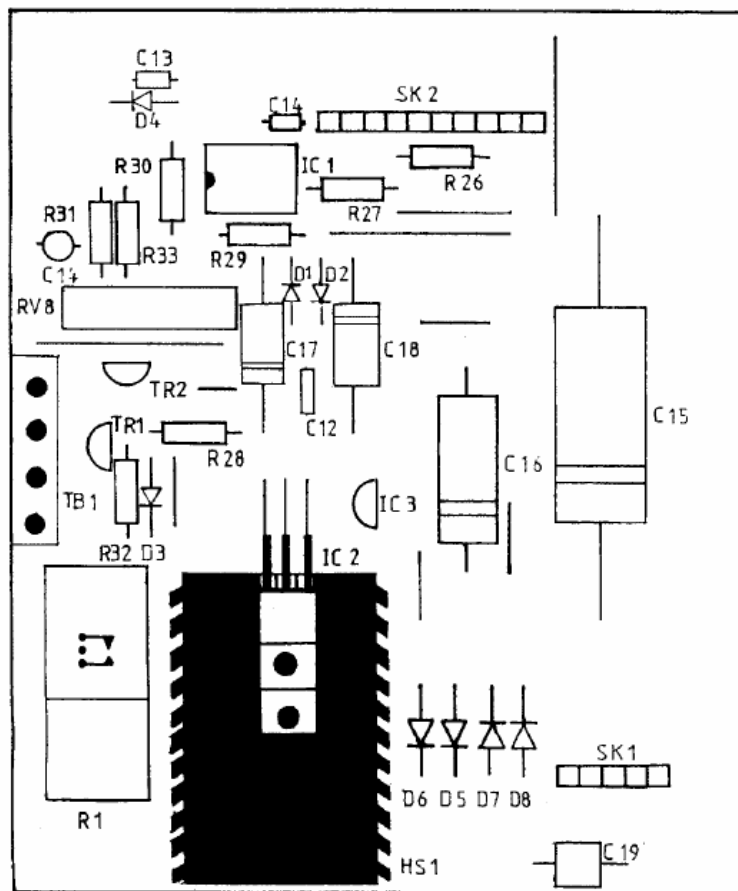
Power supply and flame failure detection printed circuit board layout.
